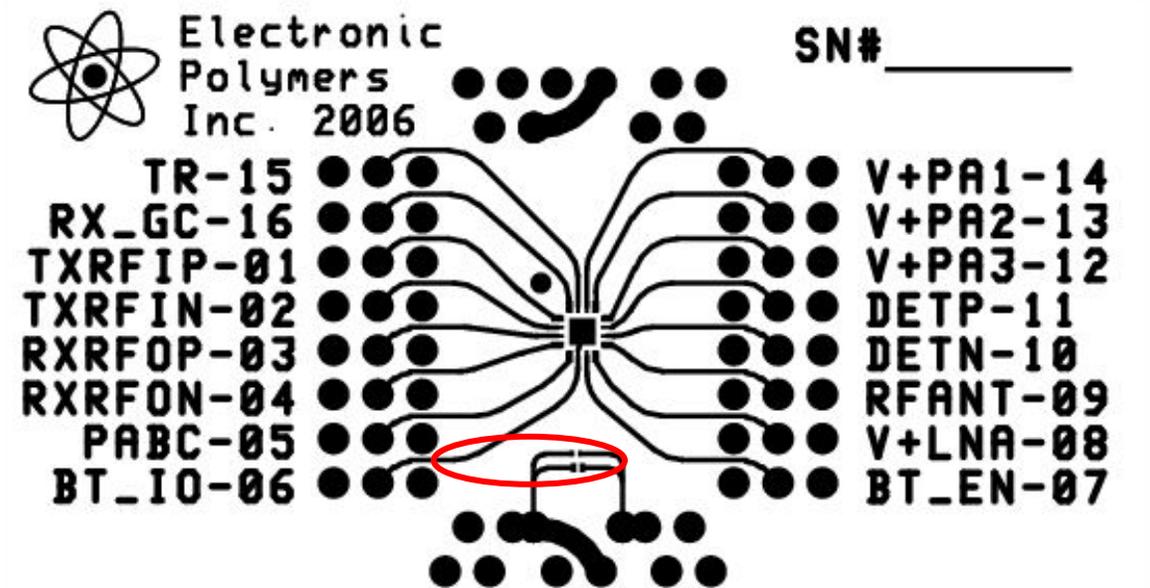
Test board layout for 3-mm x 3-mm, 16-pin PQFP with surface mount pads for EPI-FLO™ ESD protection in Phase 4
